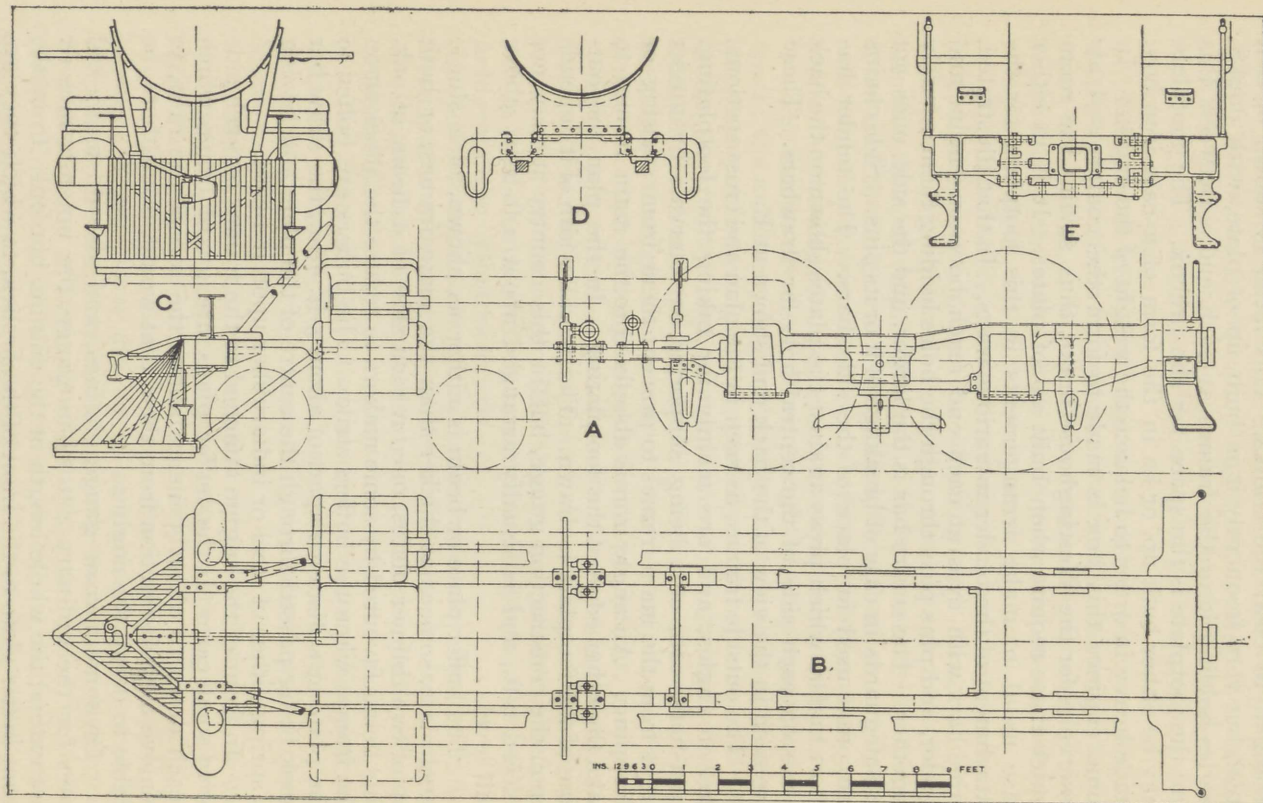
BAR FRAMING FOR AMERICAN ENGINE.
